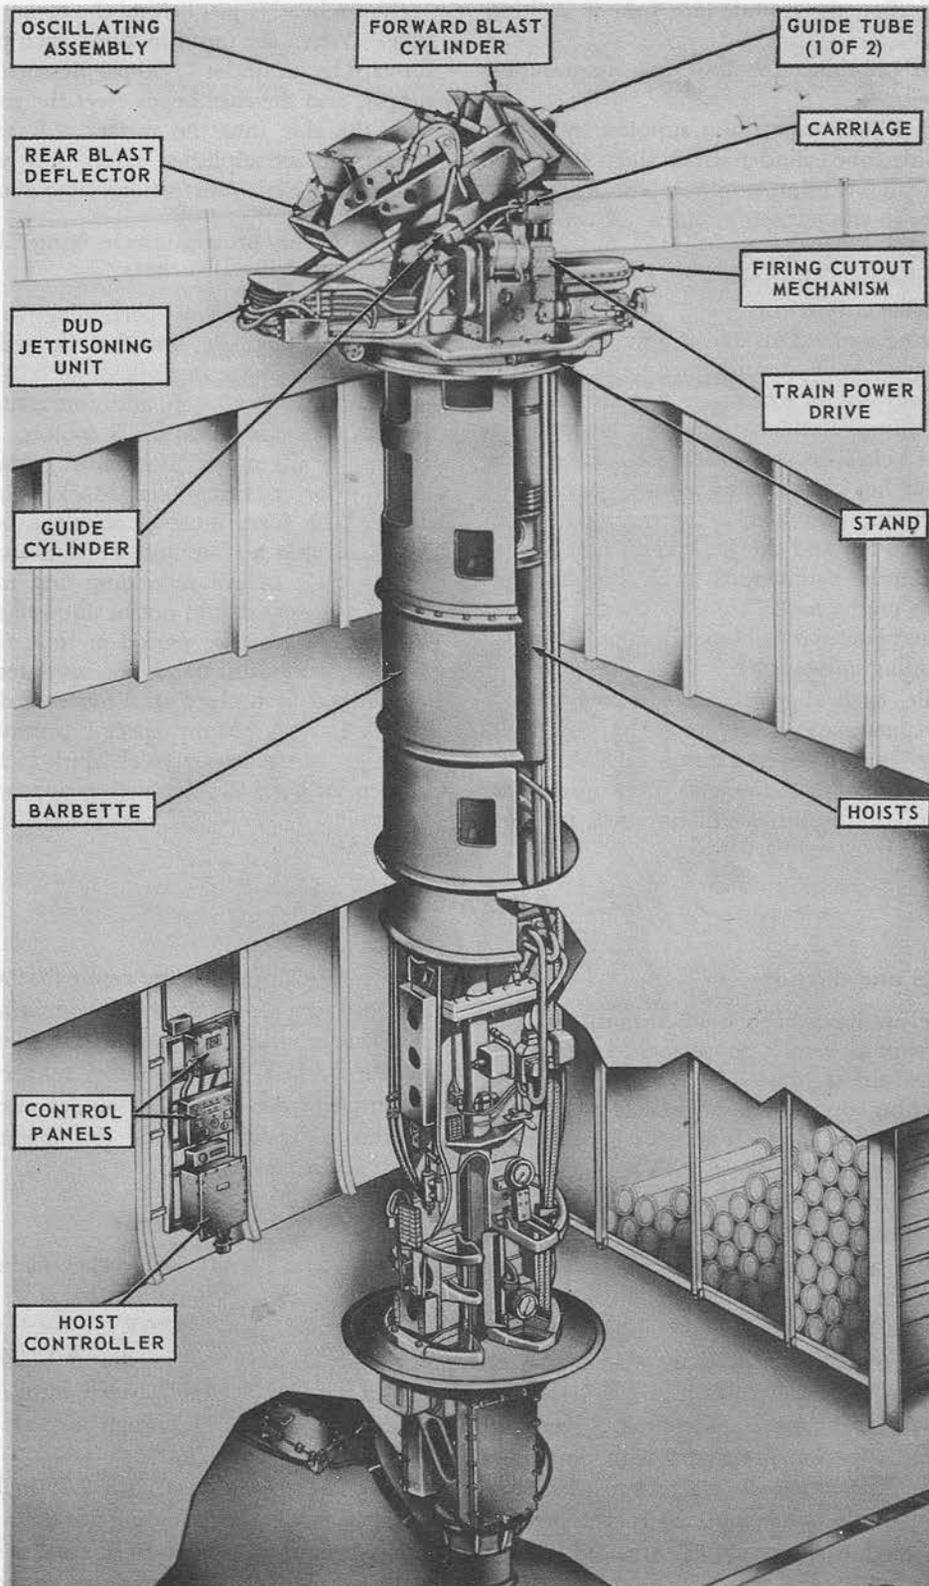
B7.—Mark 105 rocket launcher assembly. Partial cutaway of launcher installation.
